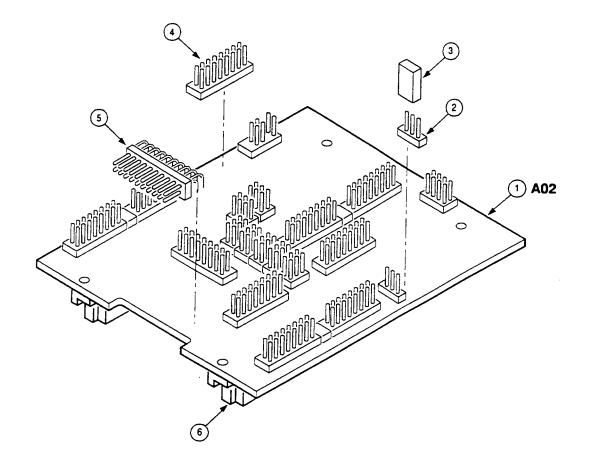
68331/332 Evaluation Board probe adapter exploded view
